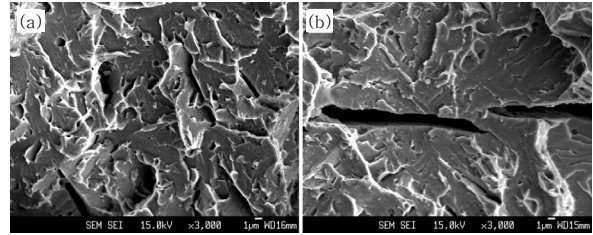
SEM fractographs of the weld metals: (a) MN23; (b) MN33
